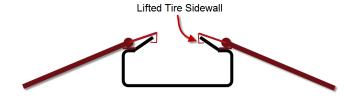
Lifted Sidewall Bottle Jack concept sketch.
